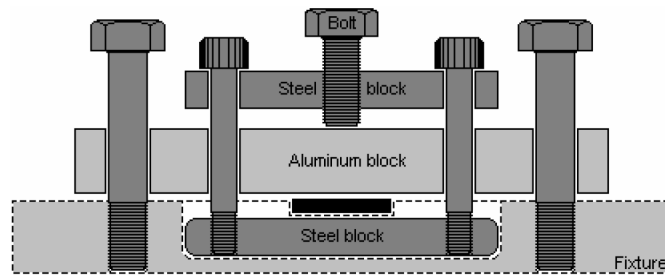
Combined Aluminium-Steel Solid Fixture Design (Villegas and Bersee 2009)
